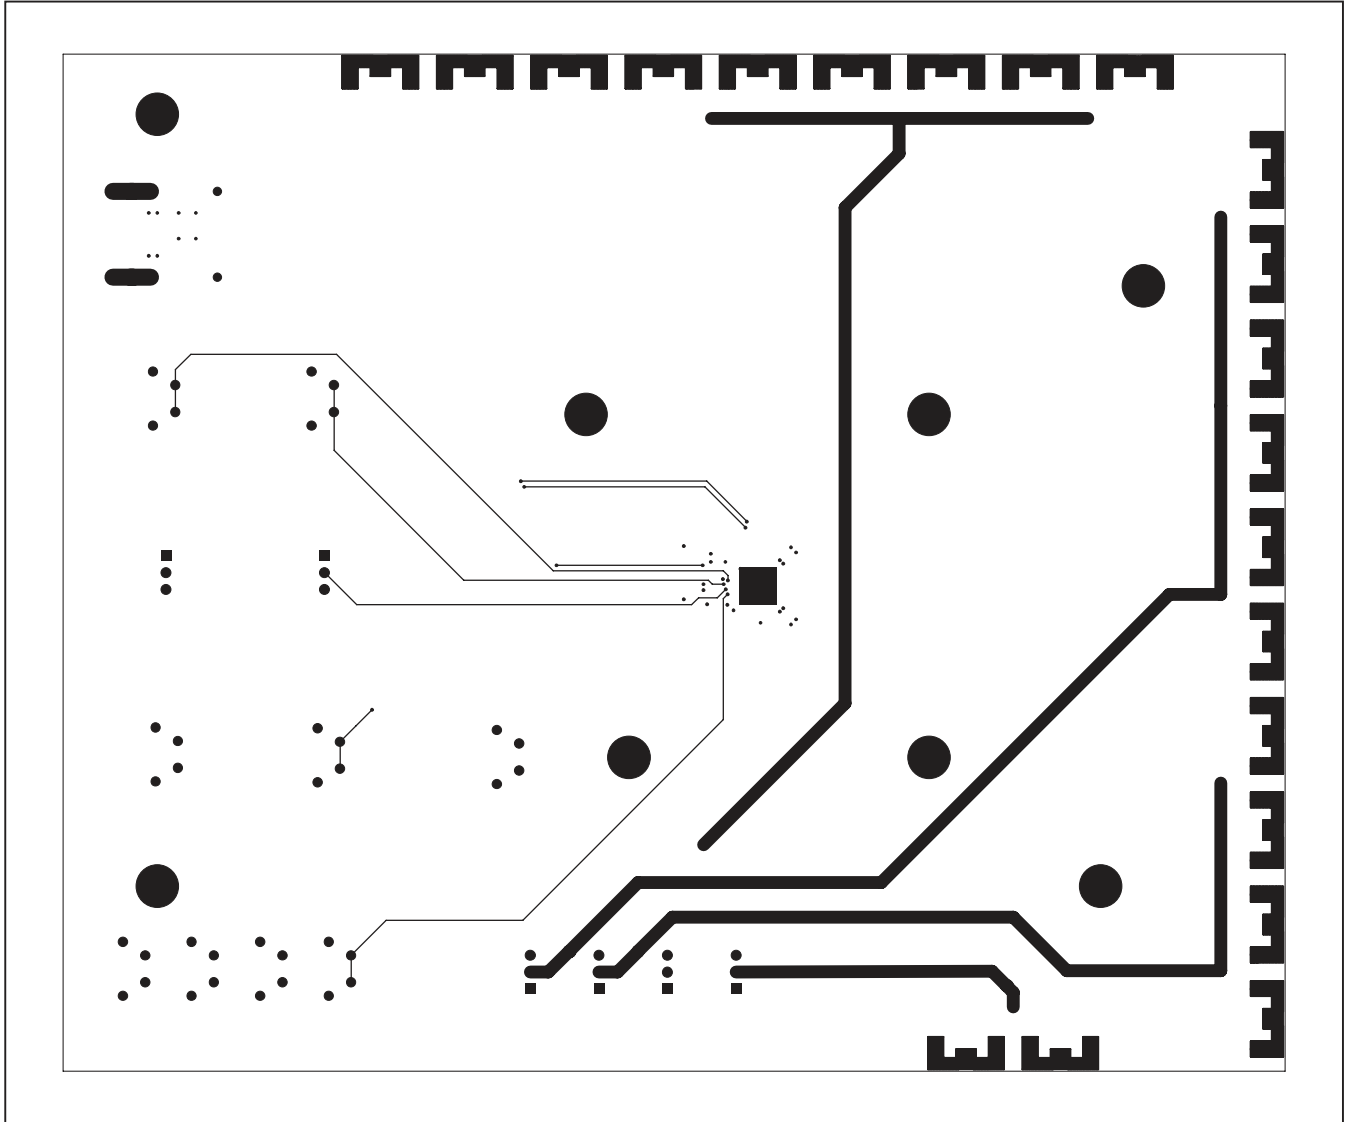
MAX3612 EV Kit PCB Layout—Solder Side
